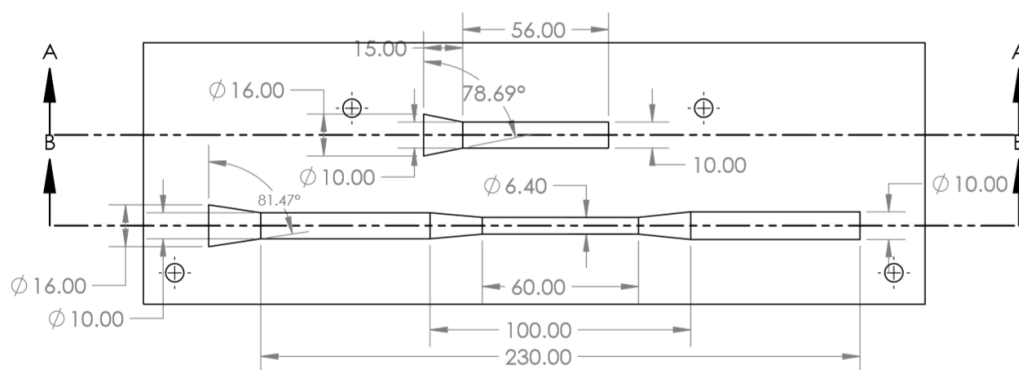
Moulding Design for Ti-6Al-4V Investment Casting
